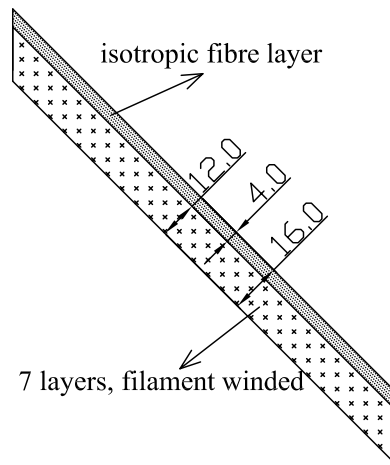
Layer construction and thickness - buoy without foam layer, dimensions in mm.
